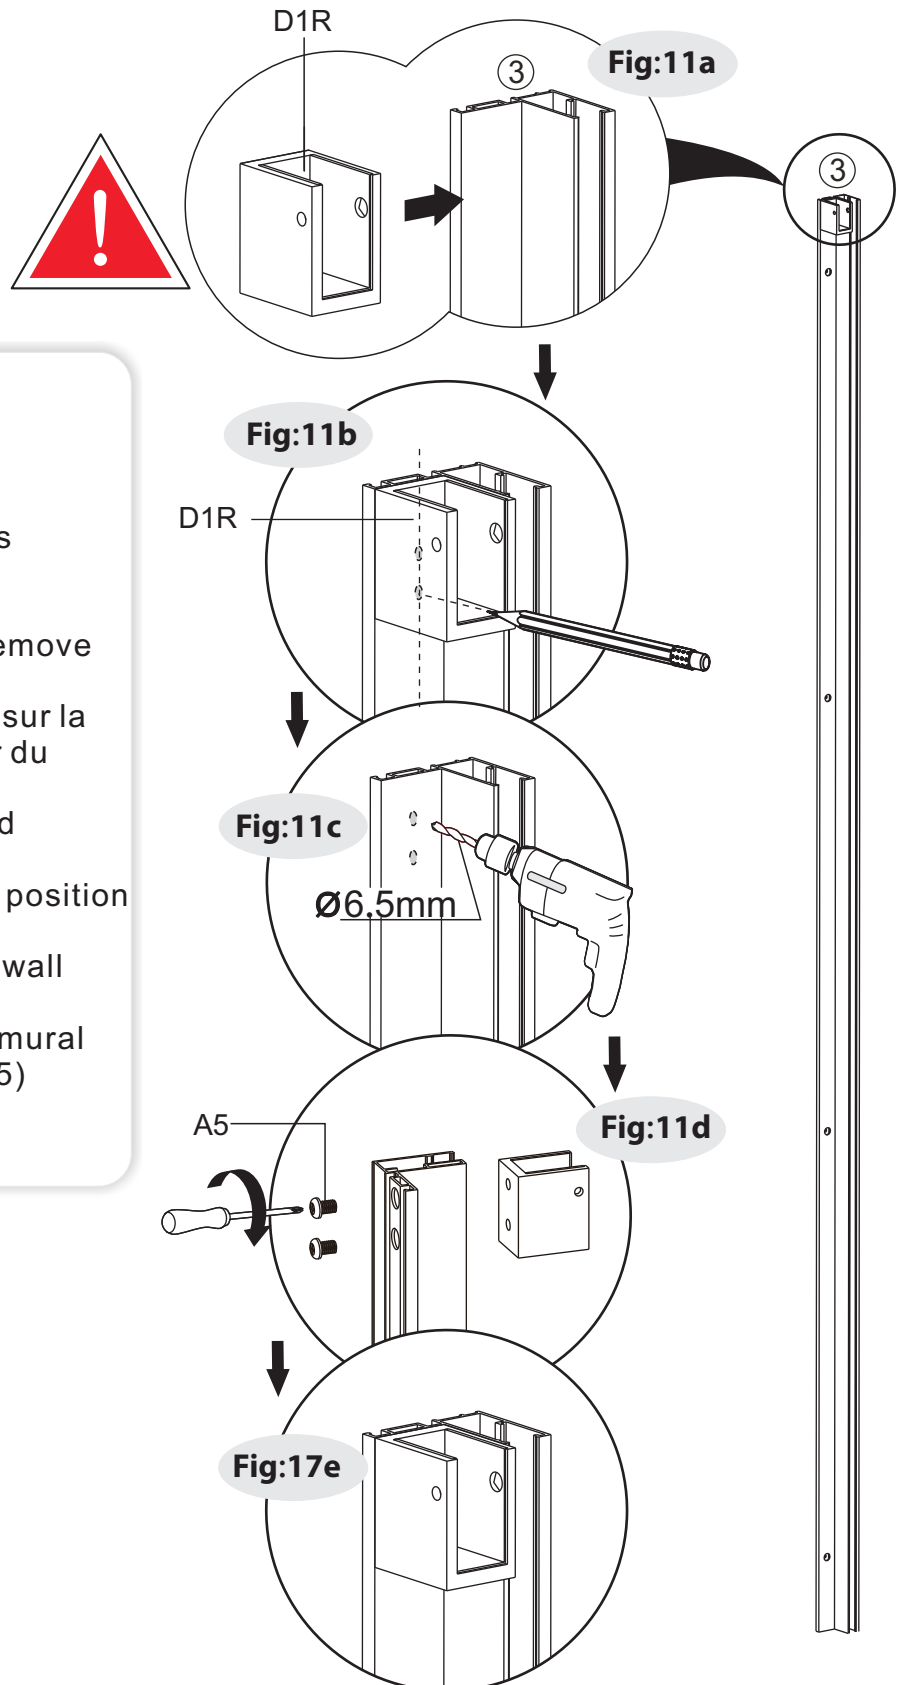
Position the wall fastener(D1R) on top of wall profile.
